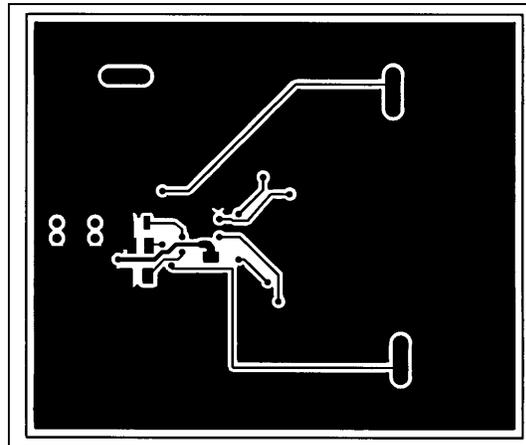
MAX742 EV Kit PC Board Layout—Solder Side
